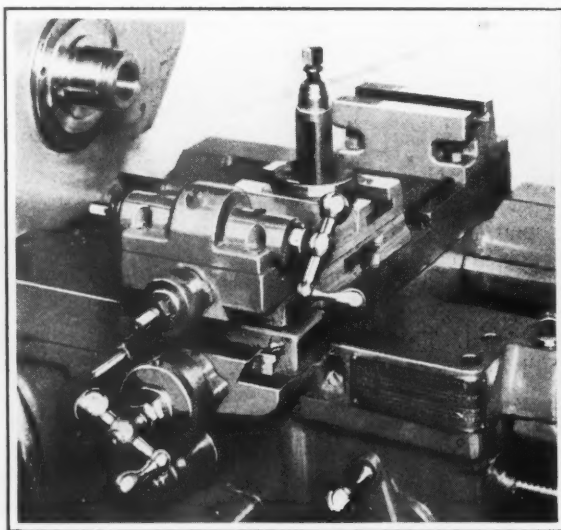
Front and Rear Tool-block Construction with Right-angle Adjustment for Cross-feed Screw
